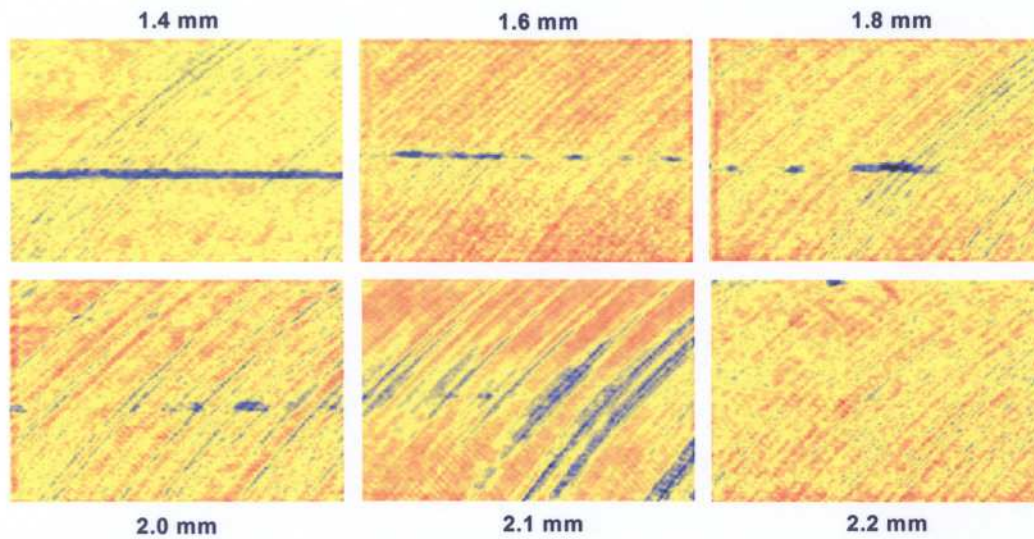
SAFT images of the bottom surface for different pin penetrations as indicated along the weld
